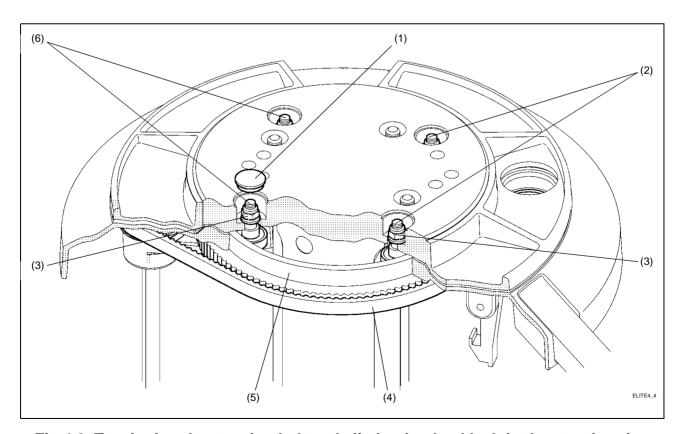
Tensioning the steering belt and eliminating backlash in the steering ring
